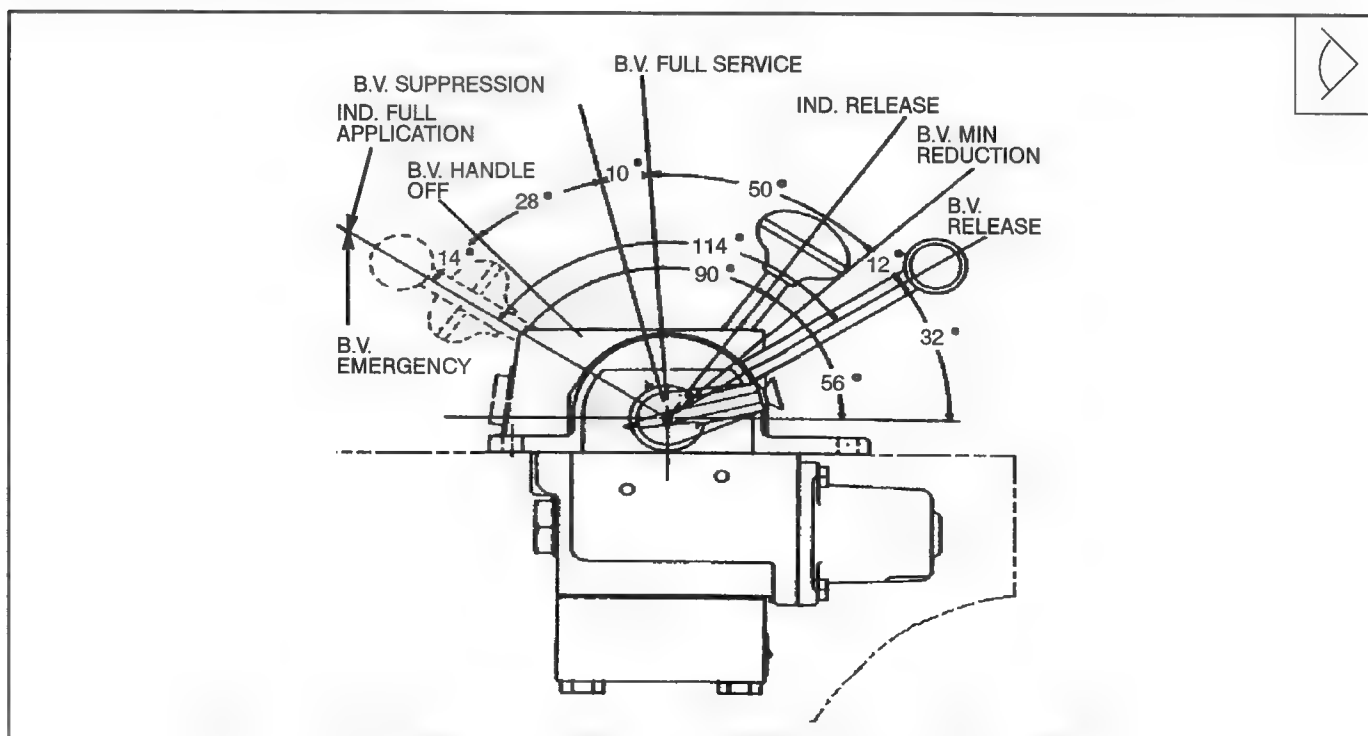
BRAKE VALVE, HANDLE POSITIONS. E-37702B.
